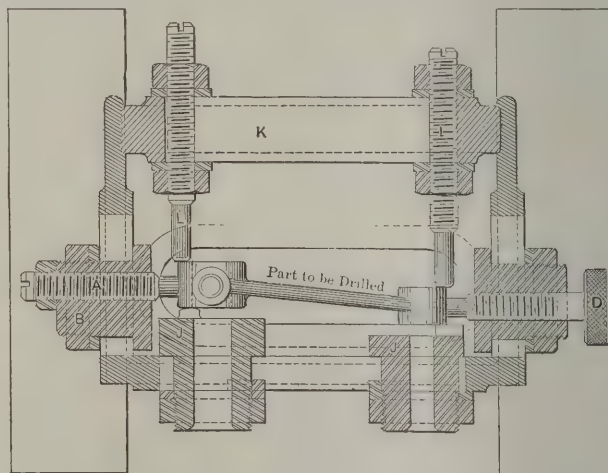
Vertical Section through Cover Screws and Jig Bushings.
